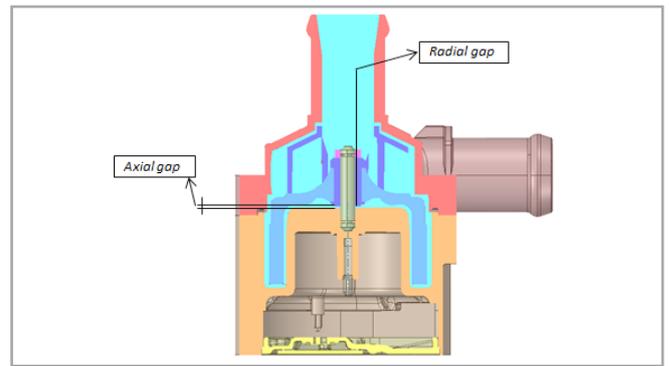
Axial and radial gaps between the rotating block and the shaft fixed to the housing.
